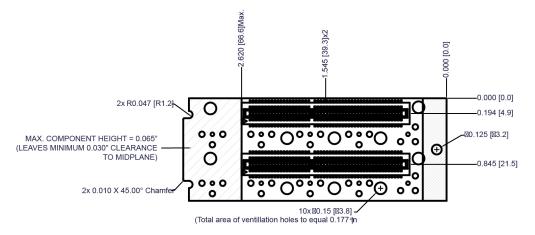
DFR-8321 Split Rear Module — Solder Side
